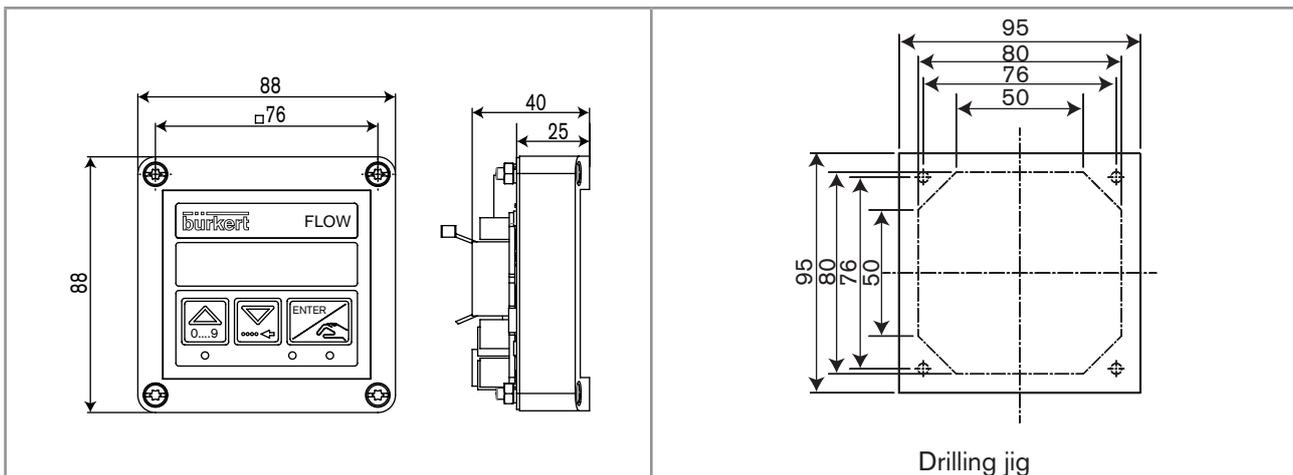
Dimensions of the dosing controller 8025 Batch, panel-mounted version, and of the drilling jig [mm]
